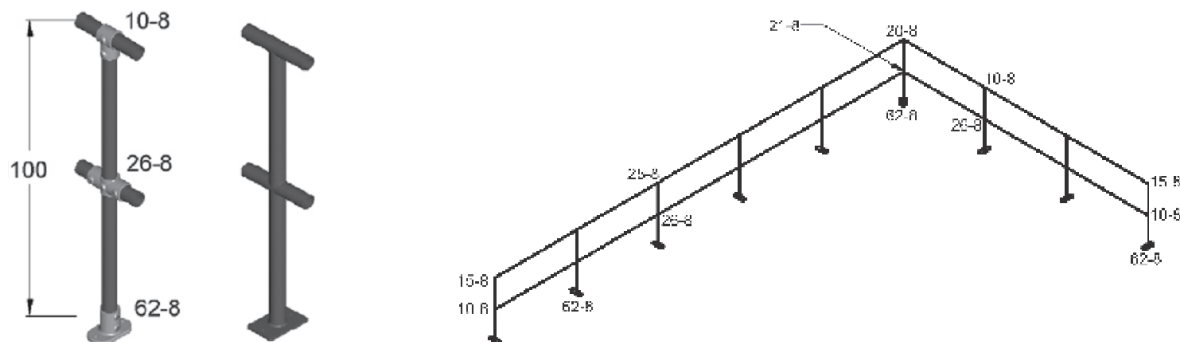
Kee Safety modular and welded safety railing examples.
